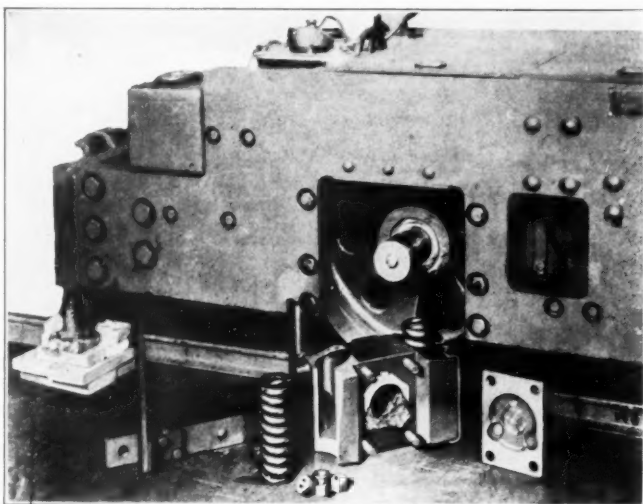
Details and method of removing journal box on a Jeffrey inside wheel type of mine locomotive.
